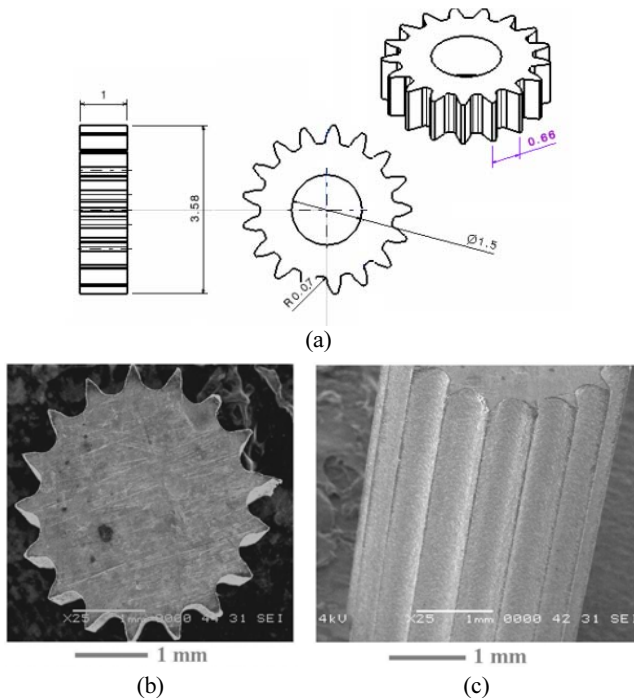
Micro sized spur gear machined by conventional WEDM. (a) CAD model and SEM image of (b) top, (c) isometric view of machined micro gear. (Gear specification: Diameter 3.58 mm, pitch 0.66 mm, height 6 mm, and number teeth 17. Process parameters: 1 A discharge current, 5 V gap voltage, 6 μ s pulse-on time, and 5 μ s pulse-off time)
